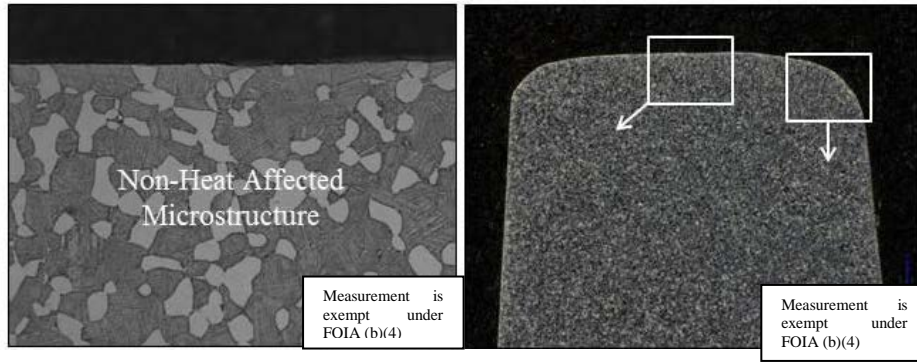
Aft Plate Seal 180 degrees from fracture location (Tab J-131)
